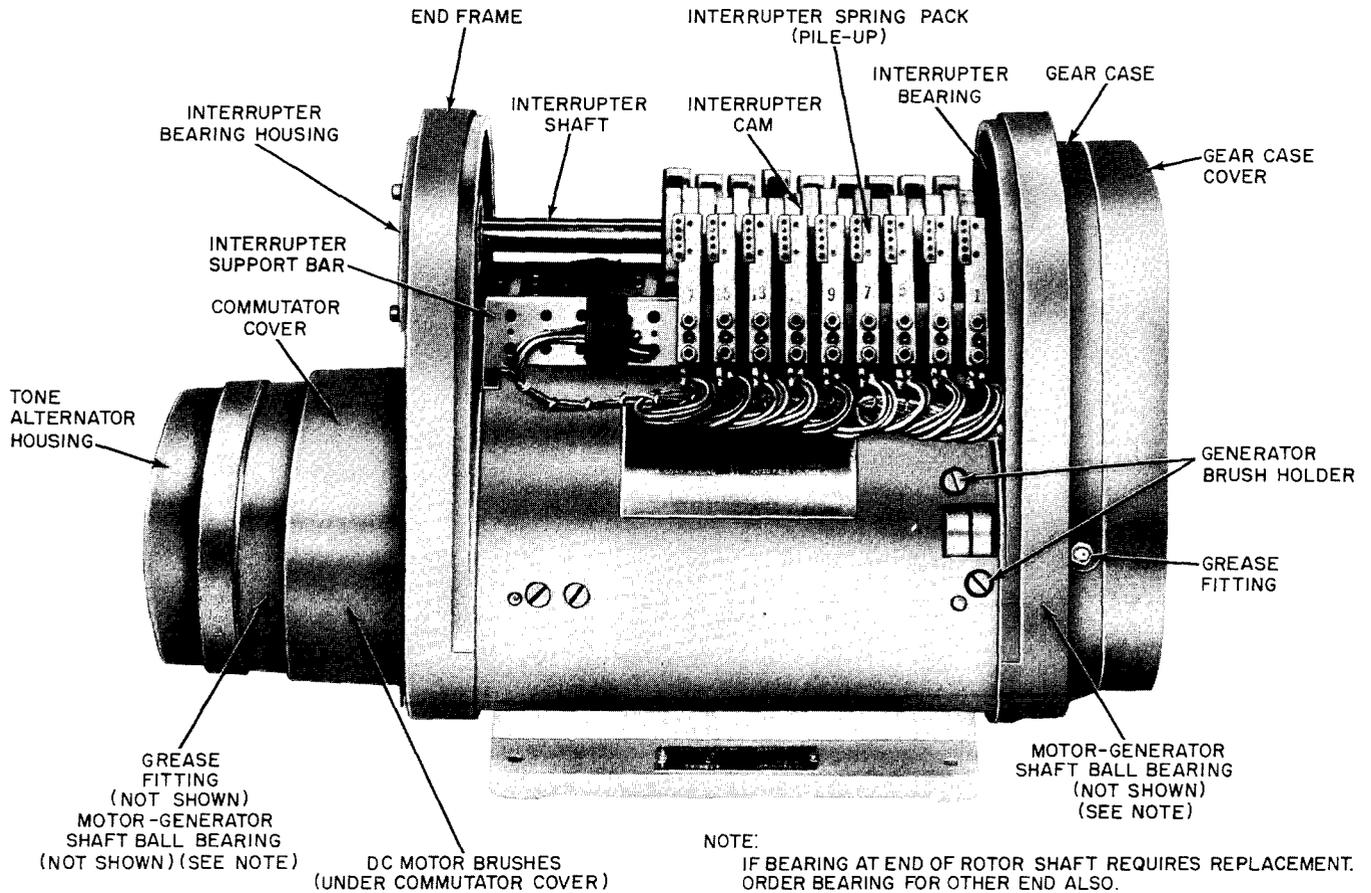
KS-1532 DC Motor Driven Ringing Machine—Interrupter Cover Removed—Commercial Electric Products Company (Same design previously manufactured by Holtzer-Cabot)
